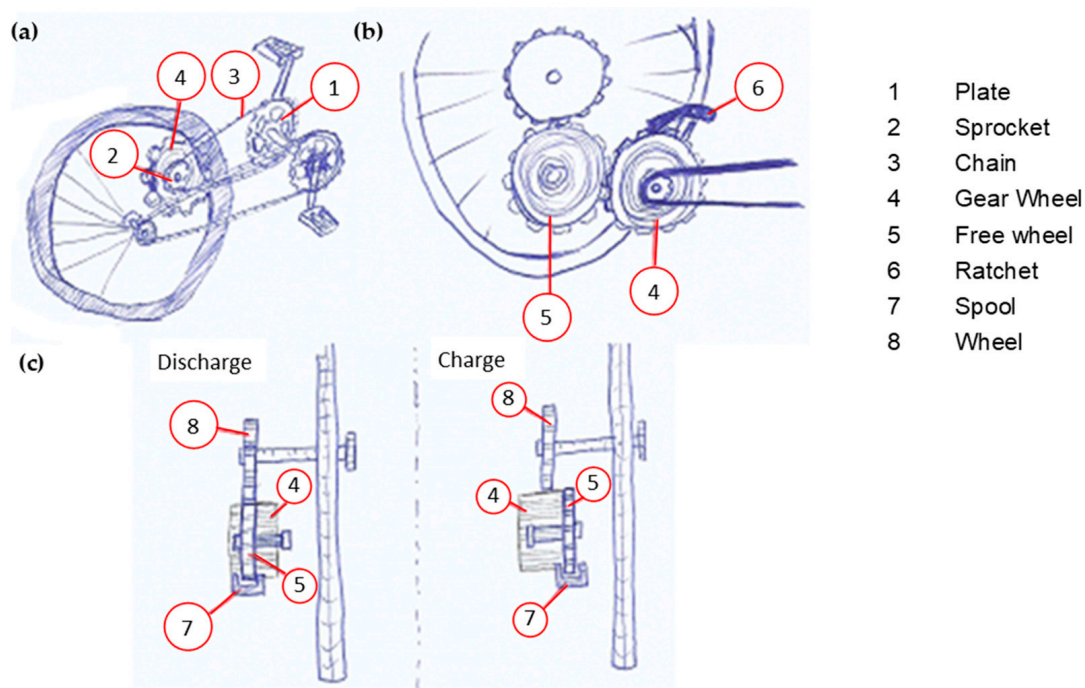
Second proposed sketch: (a) general view of the sketch, (b) front view of the load area assembly, and (c) side views of Sketch 2 in discharge and charging positions.
